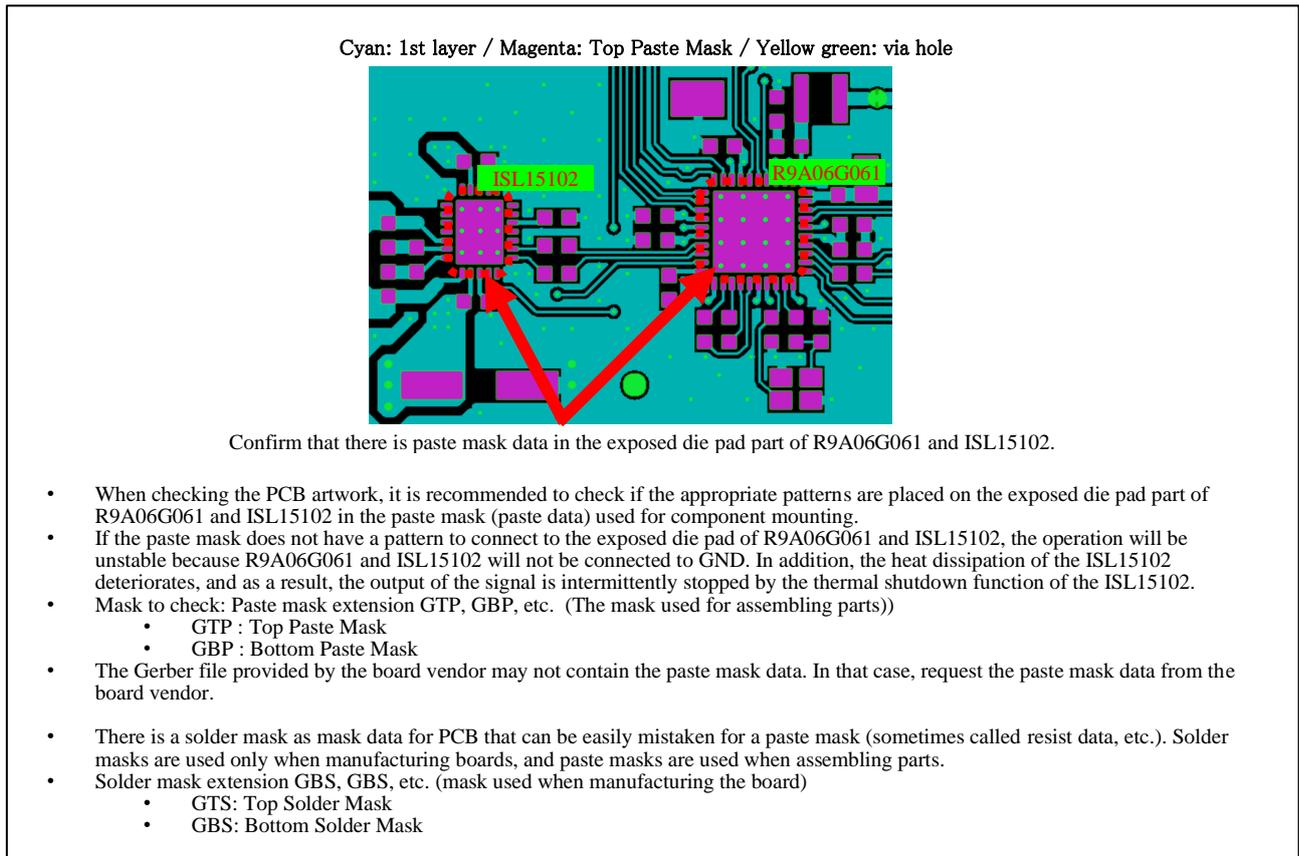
Example of checking the paste mask (paste data) used for component mounting
